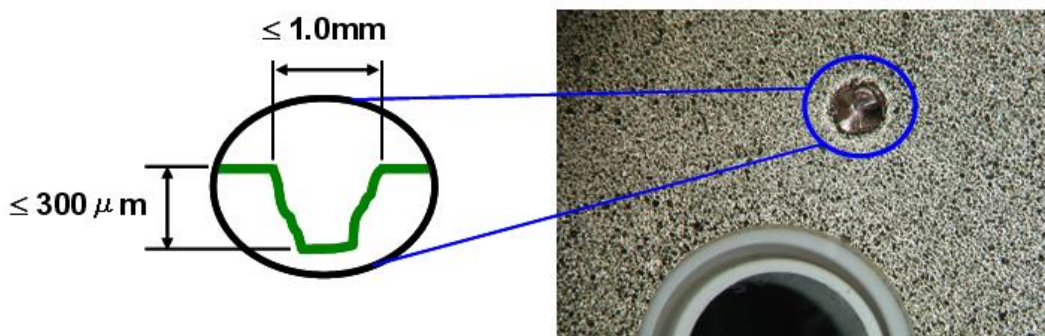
Etching hole (hole down to substrate level) in the MiniSKiiP® bottom surface
